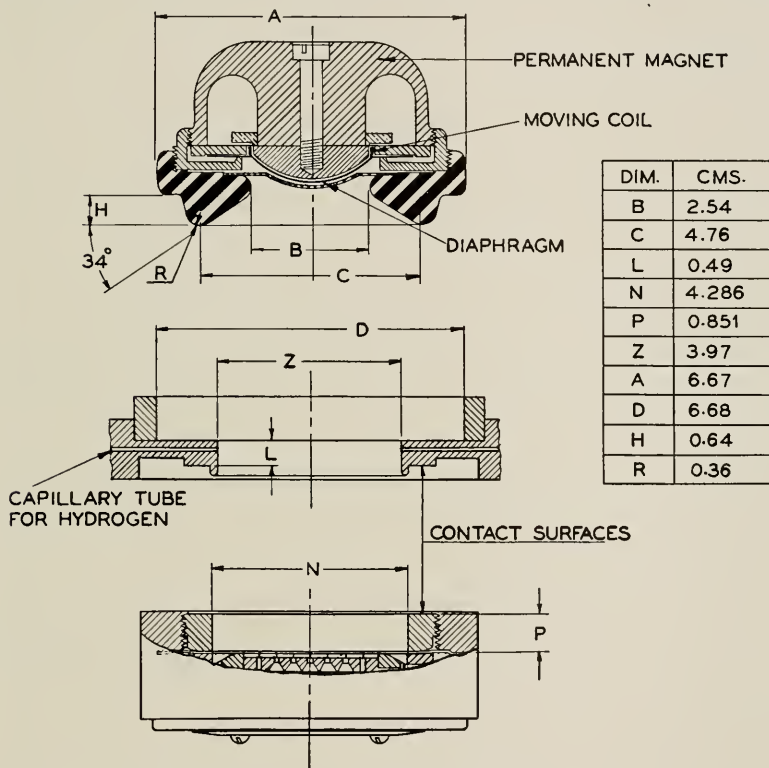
Schematic of moving coil receiver, coupler and condenser transmitter.
